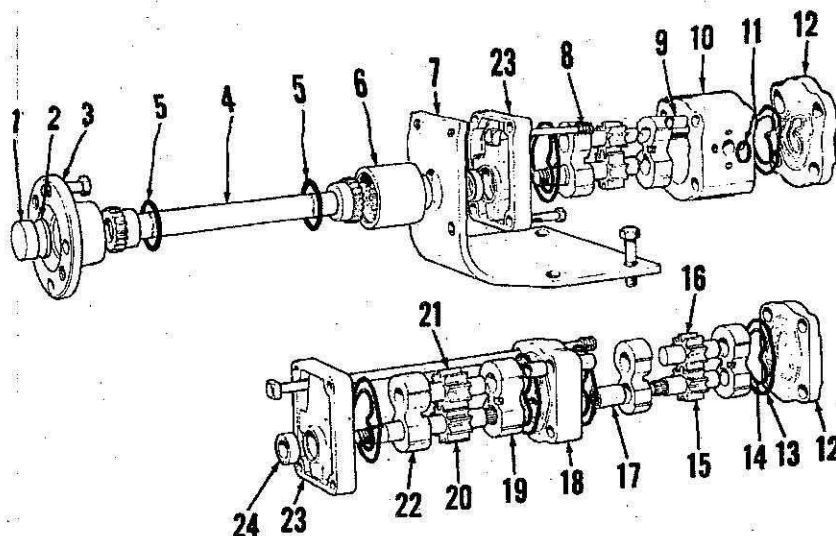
Exploded view showing construction of both the single and dual pump assemblies for Model 1200. Pump drive components and mounting bracket are also shown; pump is mounted in front of radiator (see Fig. 195) and is driven from engine crankshaft through shaft (4).
